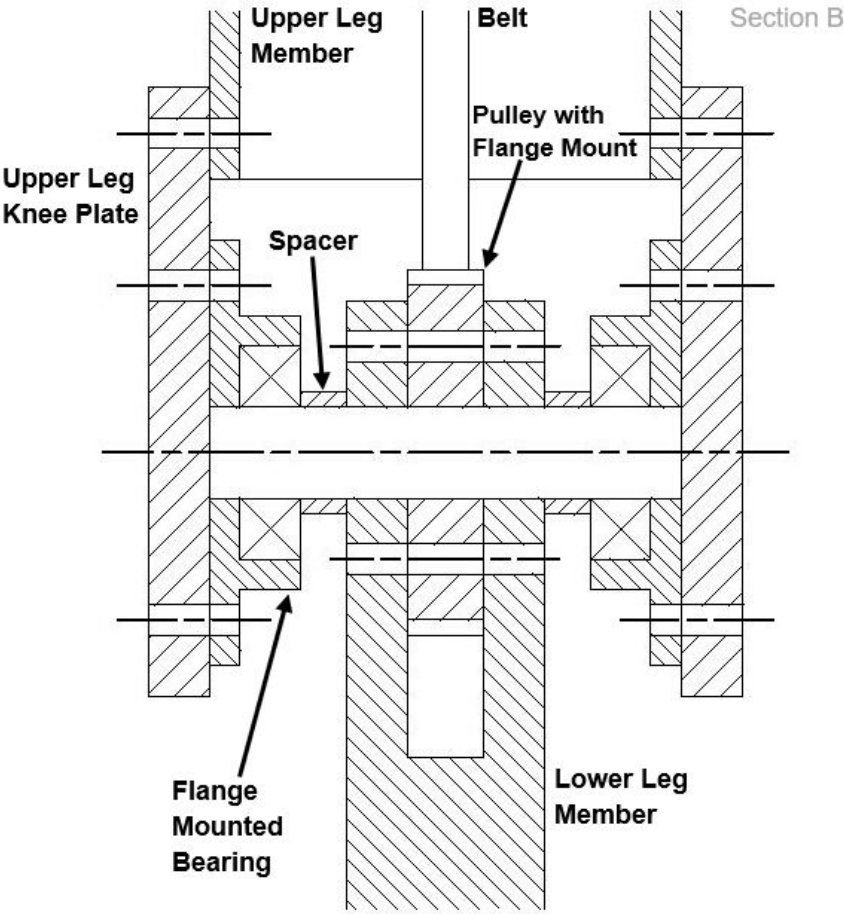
Crab Top Section View (Section B) - Leg and Knee
